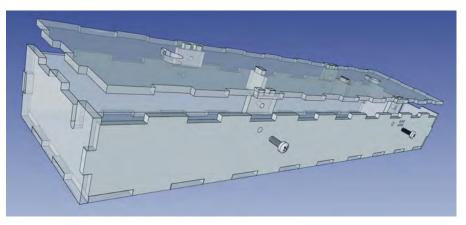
this shows the two halves of the case being put together. Machine screws are shown, but we recommend you use No.4 self-tapping screws. Be gentle when cutting the threads initially; if any of the smaller pieces break off during this process you will have to re-glue them and wait for the adhesive to set again.
